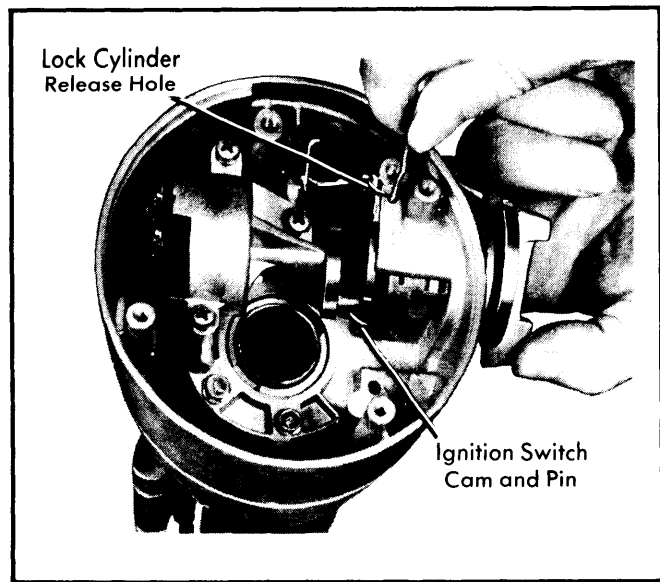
Typical Column Type Ignition Switch Lock Cylinder Removal
